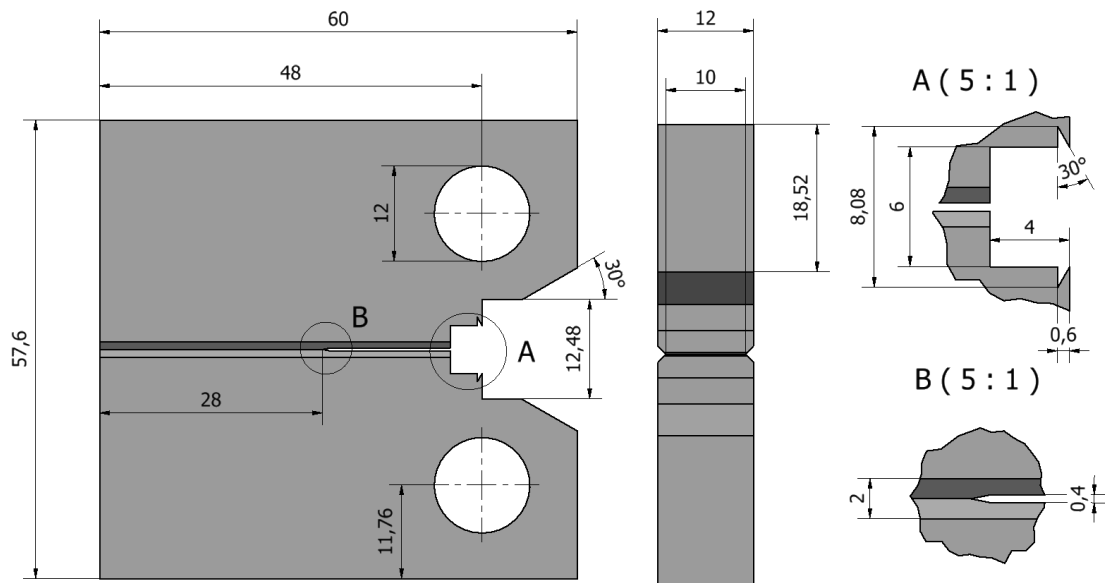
Geometry and dimensions (mm) of the CT specimens used in the fracture toughness tests.
